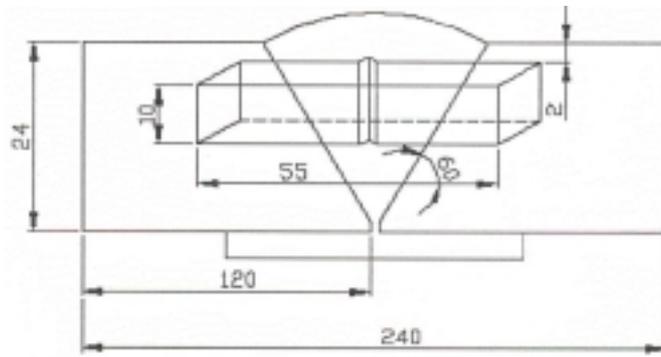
Schematic diagram of Charpy V notch impact test specimen in the weld joint geometry (unit:mm)
